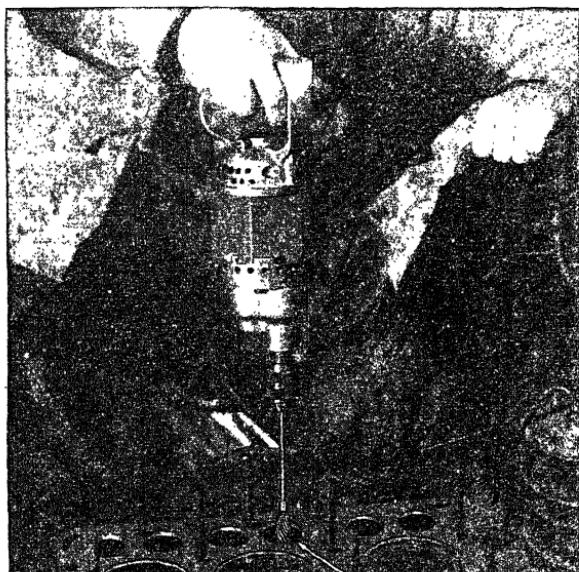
Using Wire Brush for Cleaning Valve Guides of Carbon and Gummed Materials (Black and Decker Practice)
